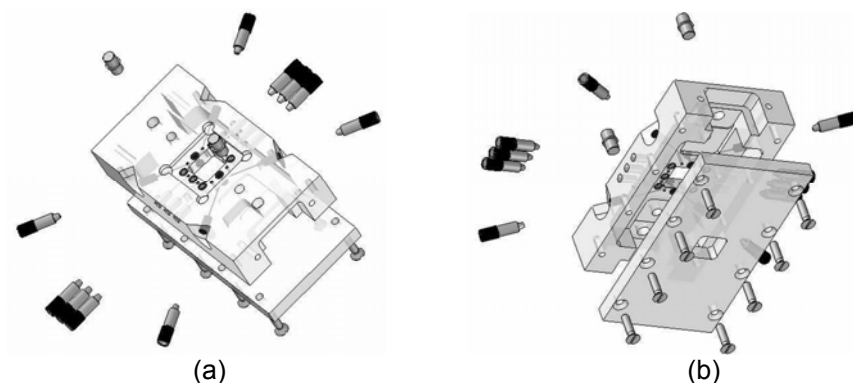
Top view (a) and bottom view (b) of the interface design.
